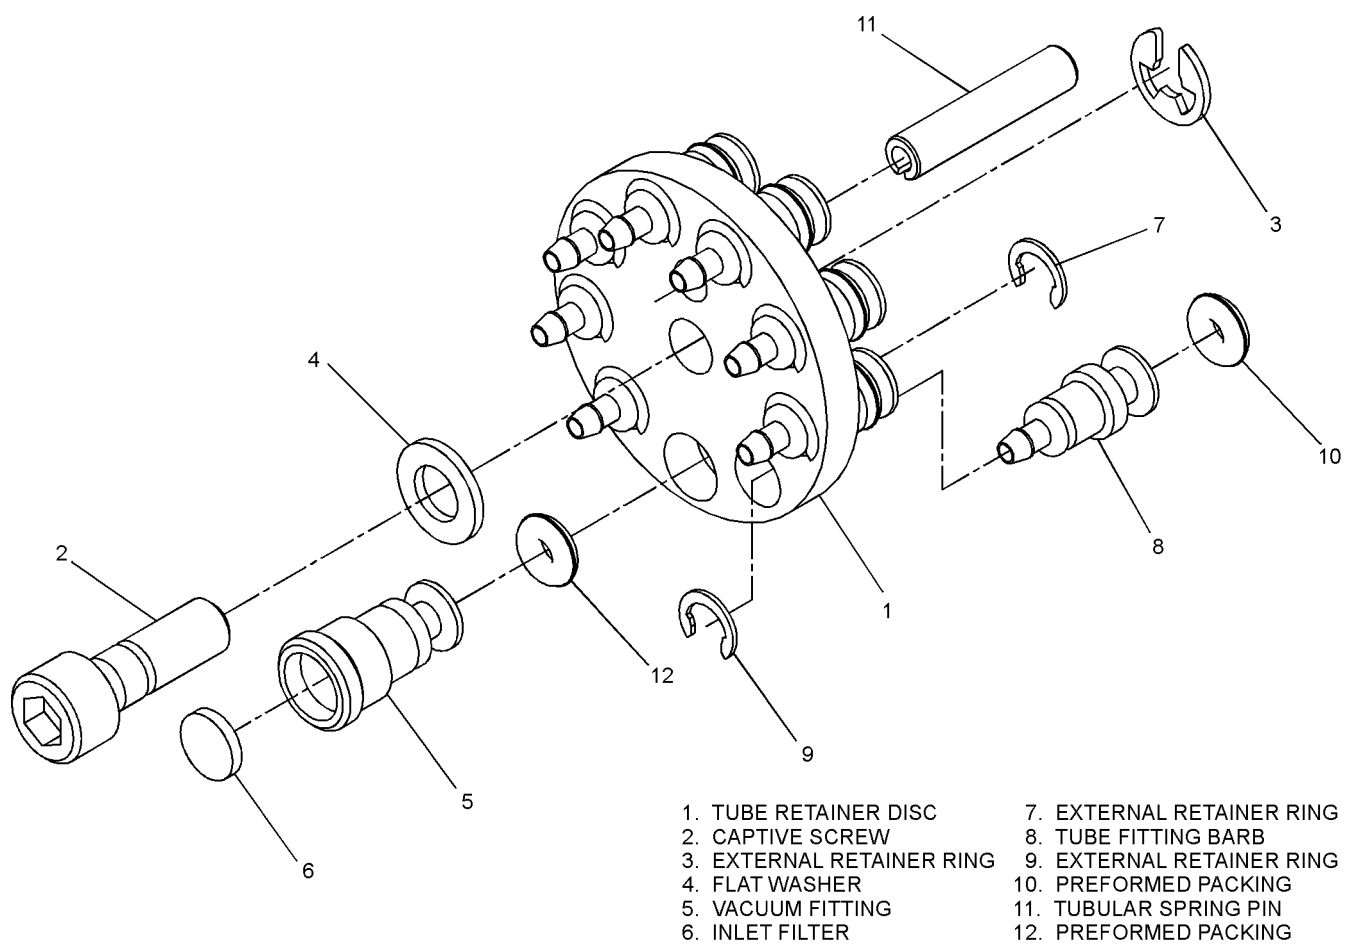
Tube Fittings Disc Assembly, P/N 1653870-1 Removal/Assembly
